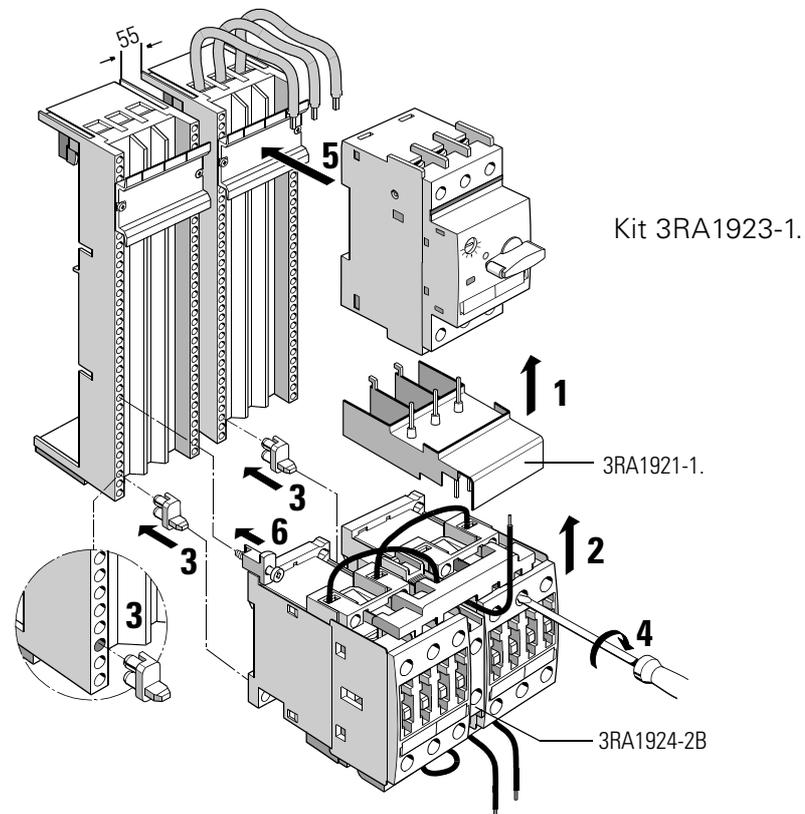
Self-assembly, busbars, reversing operation (frame sizes S00 and S0)
